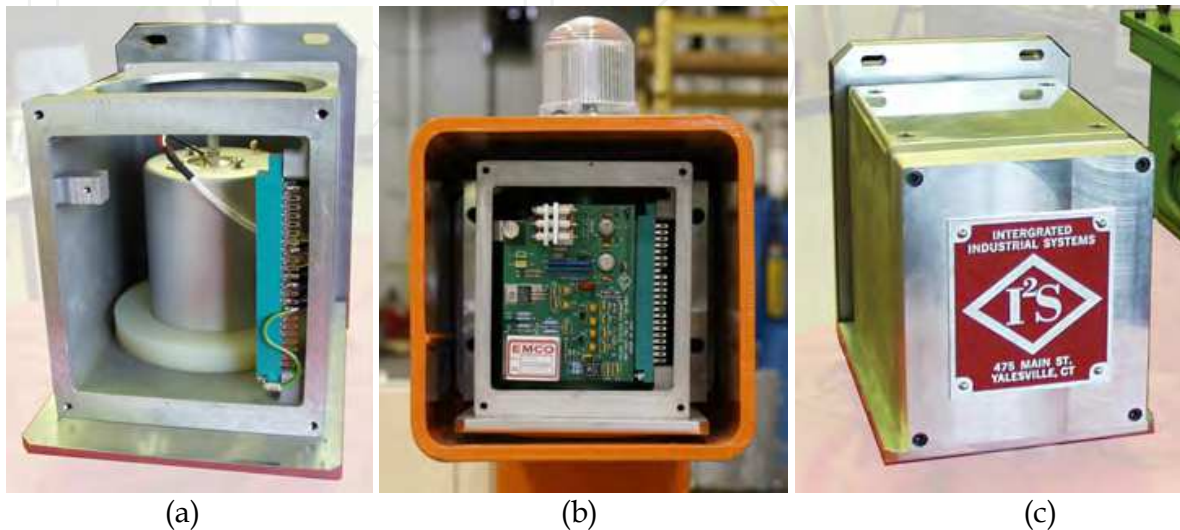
Photos of typical detector assemblies: a) Machined monoblock housing containing cylindrical ion chamber sensor, b) Mounted detector assembly with integrated electronics card with sealed cover removed, c) Fully assembled detector.
